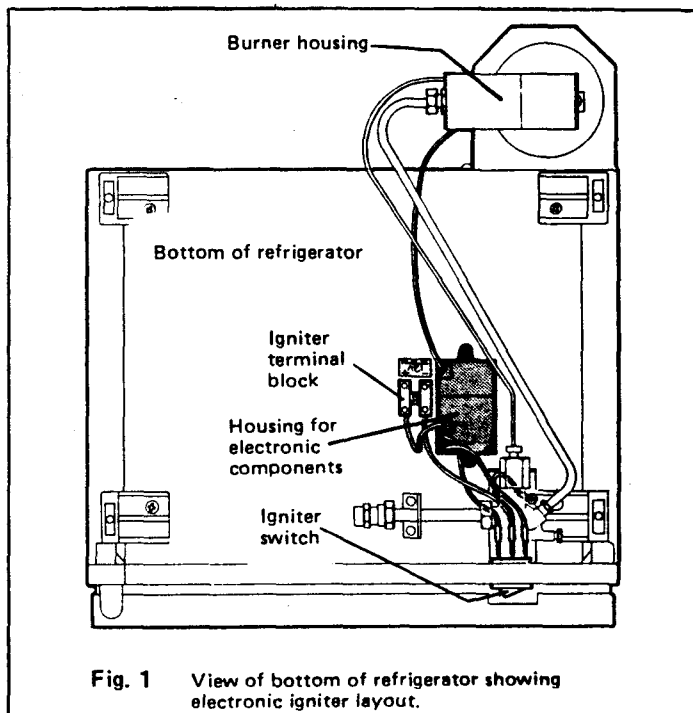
View of bottom of refrigerator showing electronic igniter layout.
